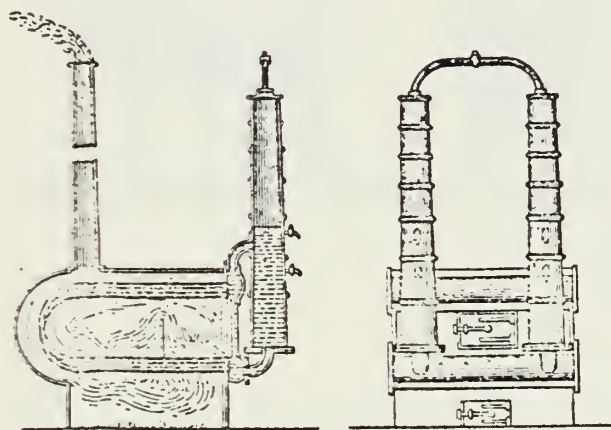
GOLDWORTHY GURNEY'S CARRIAGE BOILER - 1826
